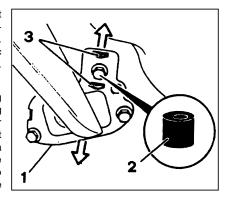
Adjusting the toe-in at the front trailing-arm mounting (1) of the rear suspension. - 2 Adjusting tool - 3 Adjustment tabs.
